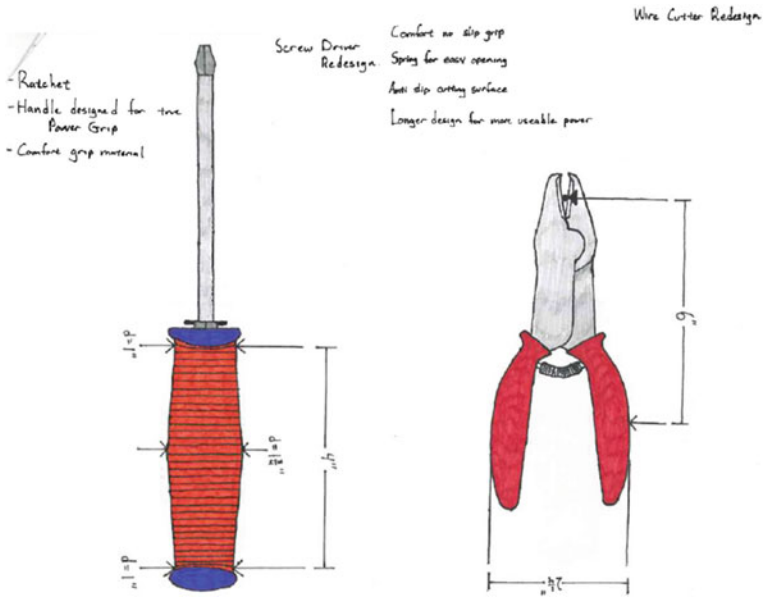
Set 3 screw driver redesign and wire cutter redesign
